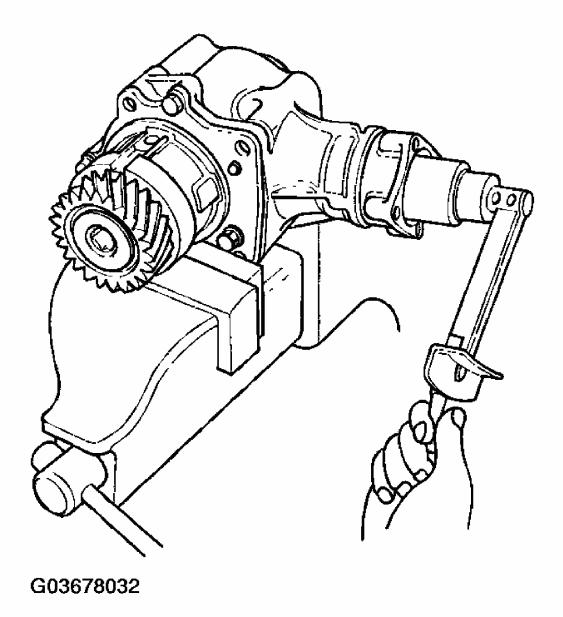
Measuring Companion Flange Starting Torque Courtesy of AMERICAN HONDA MOTOR CO., INC.
